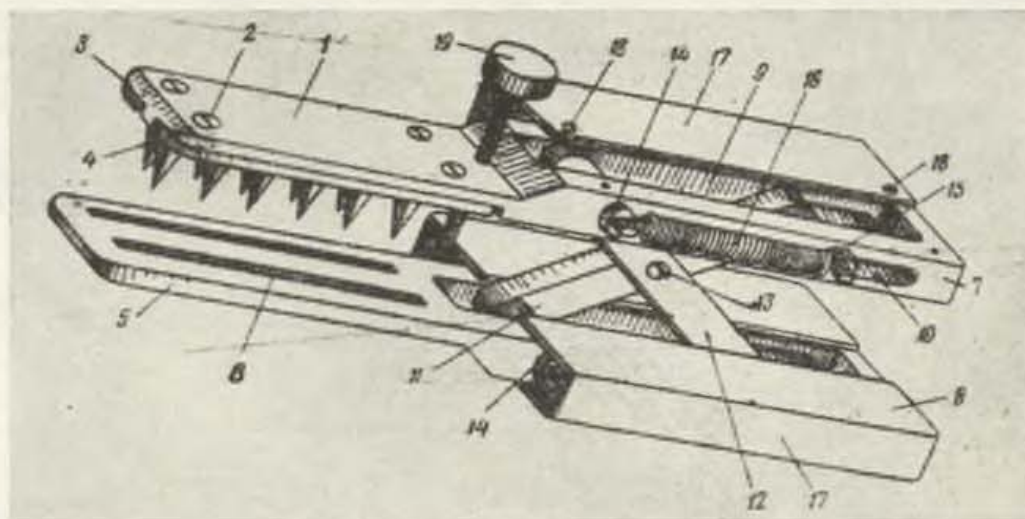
Perforator for making a multitude of holes in a skin graft with one grip
